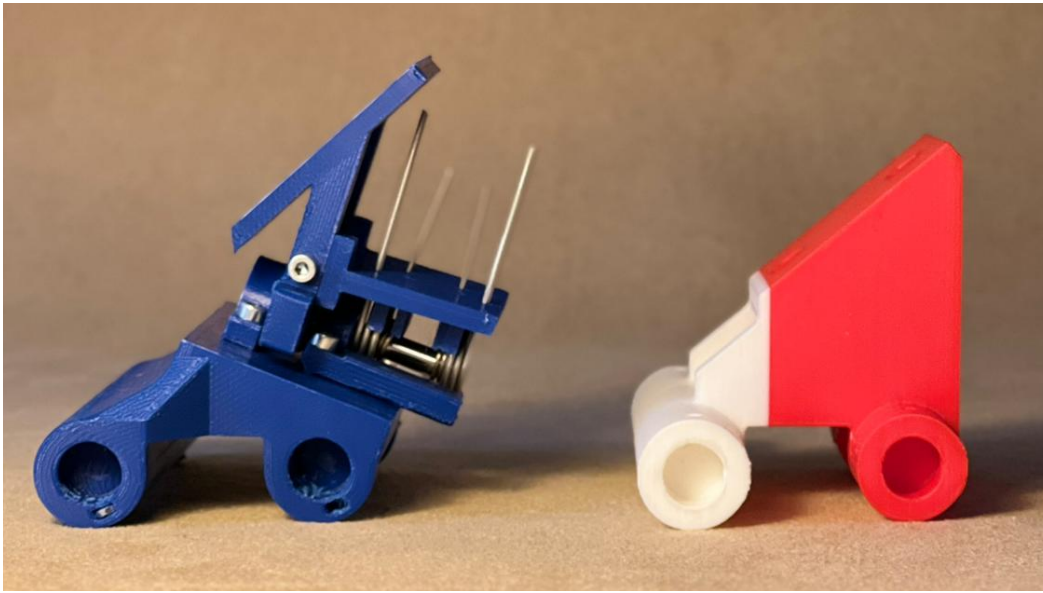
Side view (sagittal plane) of the 3D printed re-designed base (blue) and the 3D printed original base (red and white) side by side.
